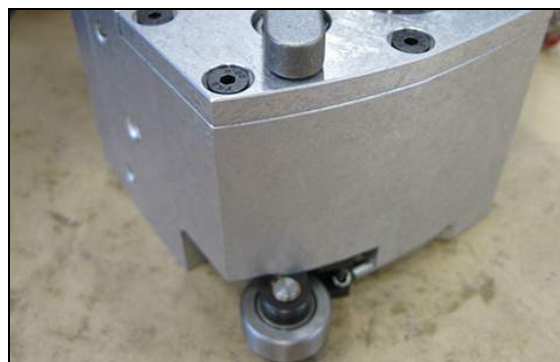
CAM ARM AND KEY OPERATIONAL ALIGNMENT
